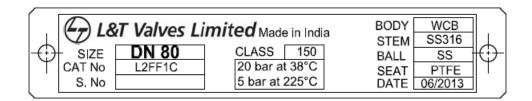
Identification Plate for Wrench / Gear Unit Operated Valves
